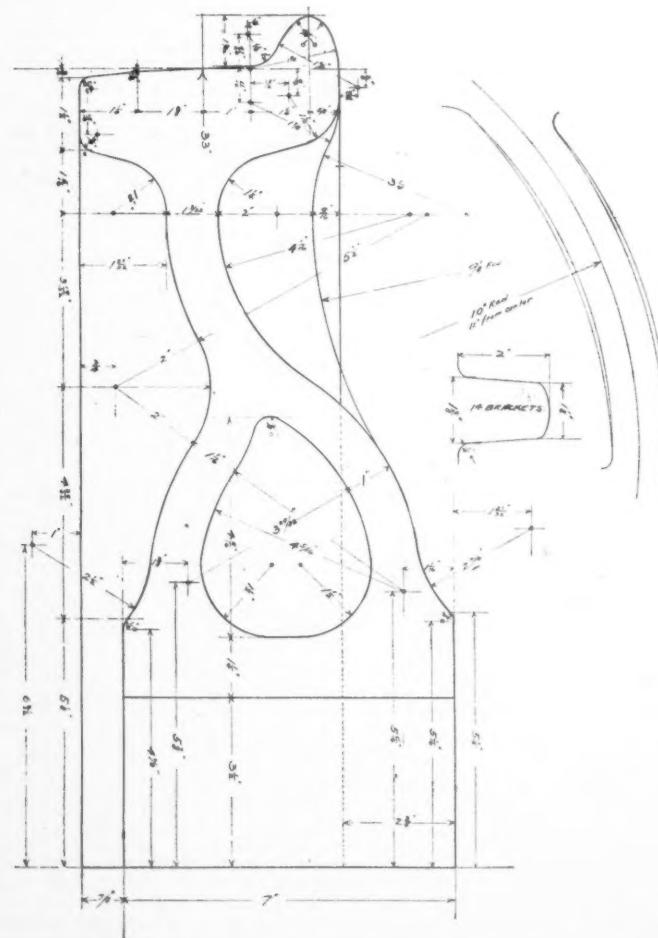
33 IN. 700-LB. CAST IRON WHEEL FOR 100,000-LB. CARS.
